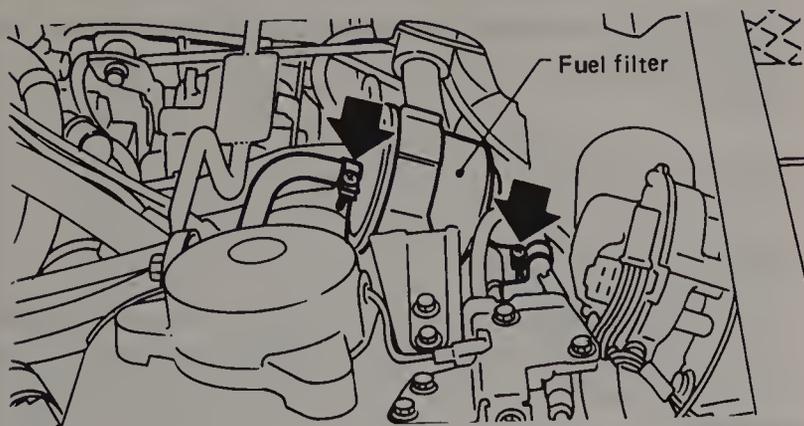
After the new fuel filter is installed, tighten the hose clamps securely and check for leaks with the engine running (Sec 4)
